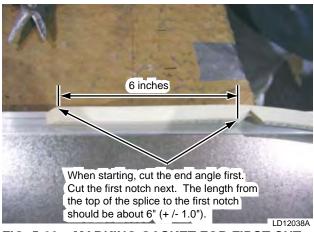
MARKING GASKET FOR FIRST CUT
